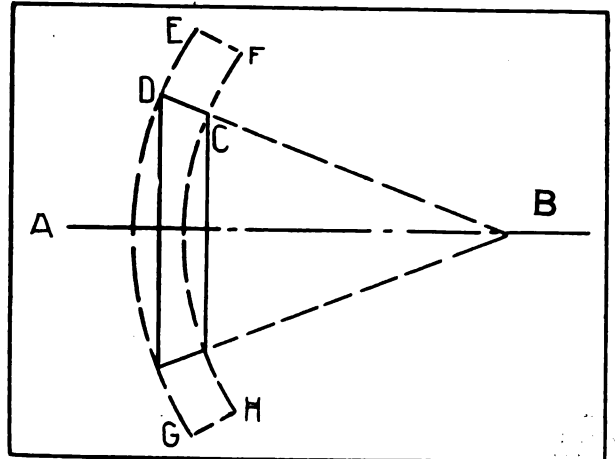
Method of Making a Pattern or Determining Size of New Clutch Leather.
